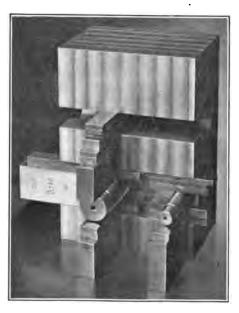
TESTING SURFACES AND DIMENSIONS
